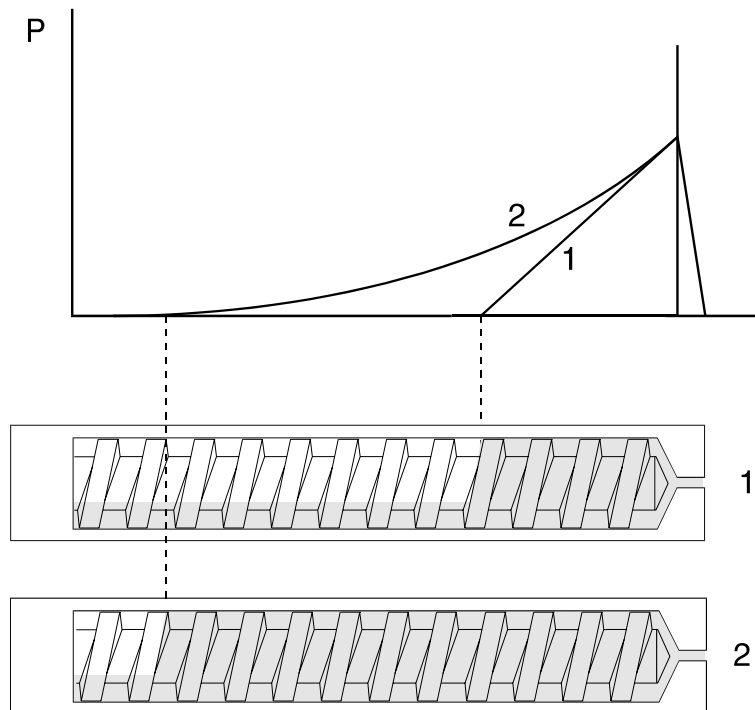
Pressure profiles 1. normal extrusion process, 2. reactive extrusion process
